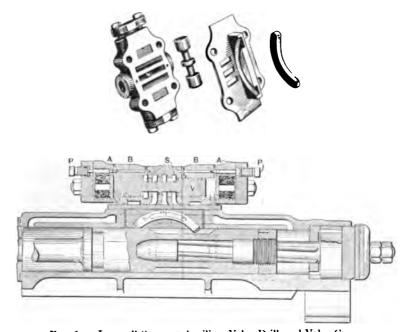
Ingersoll-Sergeant Auxiliary Valve Drill, and Valve Gear.
